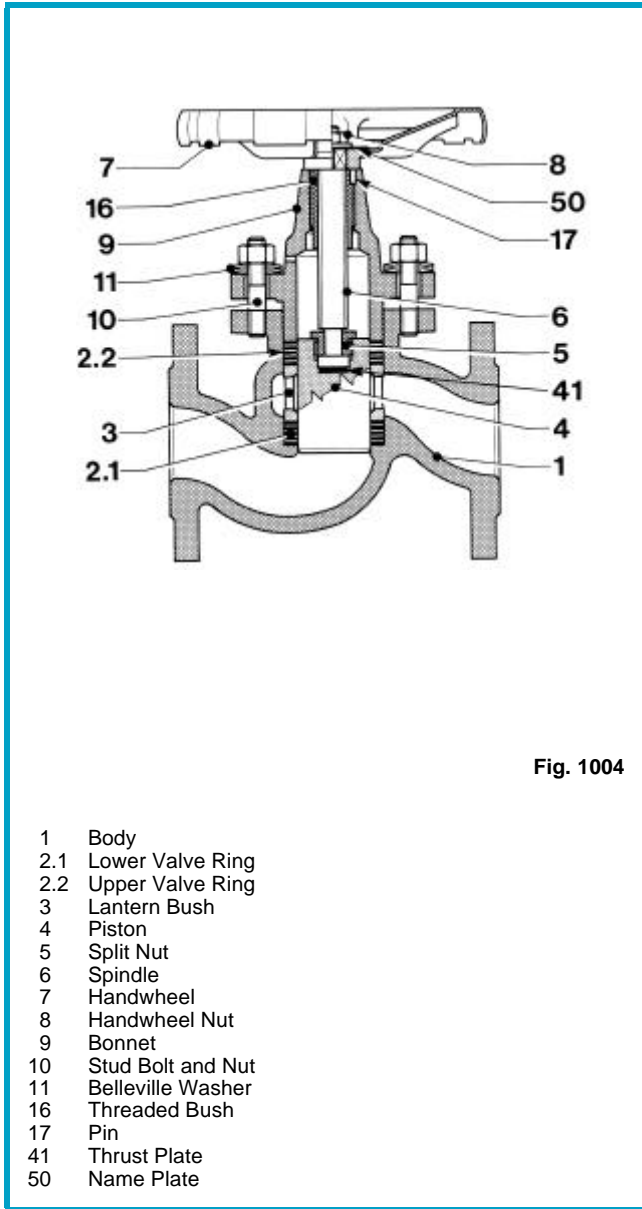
shows the simplest pattern of BONETTI® piston valves. Valve consists of a Body (1) where internally are fitted the Lower Valve Ring (2.1) ensuring upstream-downstream tightness, the Lantern Bush (3, Spacer between valve rings) and the Upper Valve Ring (2.2) ensuring tightness to environment. The two valve rings are adequately compressed by the Stud Bolts and Nuts (10) and by the Belleville Washers (11) which compensate expansion due to temperature variation.
